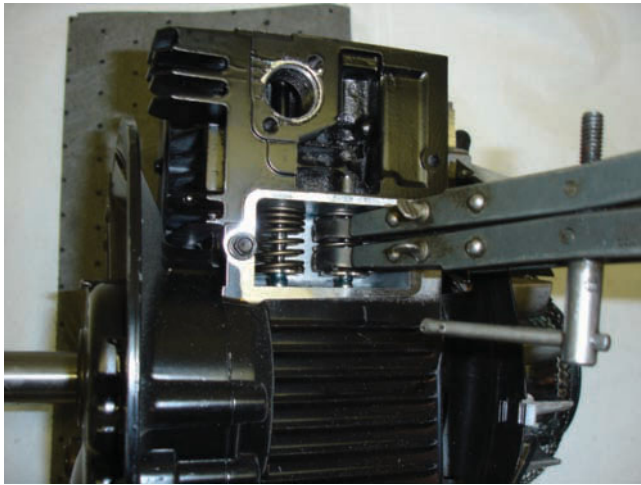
Using a special valve spring compressor to assist with spring installation.
